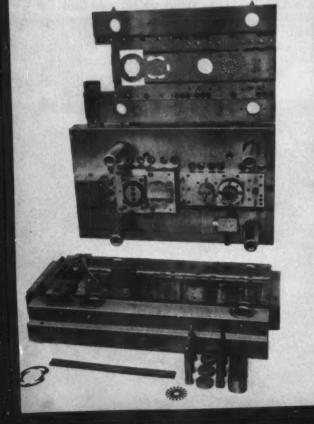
Progressive carbide rotor-stator die having four sets of interchangeable punches, pilots, and bushings for producing rotors having different-size center holes.
